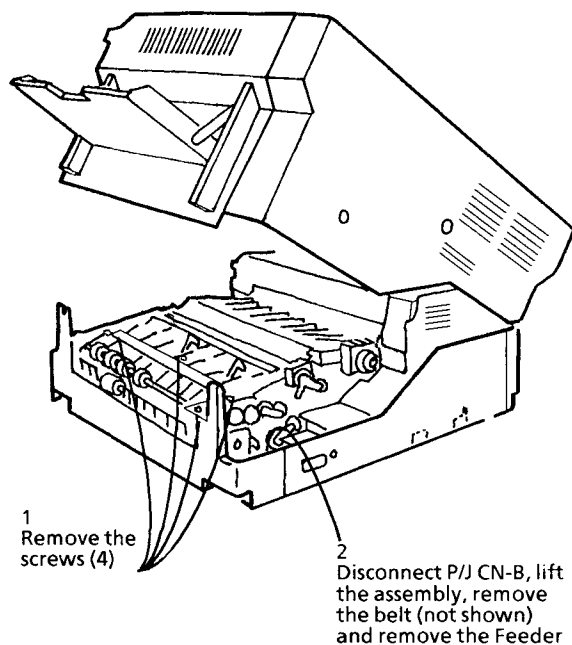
Removing the Tray 1 Feed Assembly / Transport
